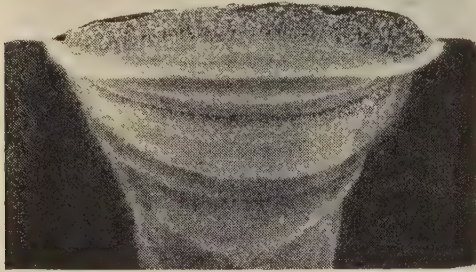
CROSS SECTION THROUGH WELDED JOINT; PICRAL-NITAL ETCH, $\times 1$
